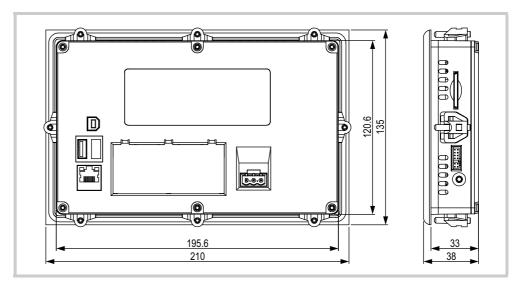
Mechanical dimensions of the 7.0" devices in mm
